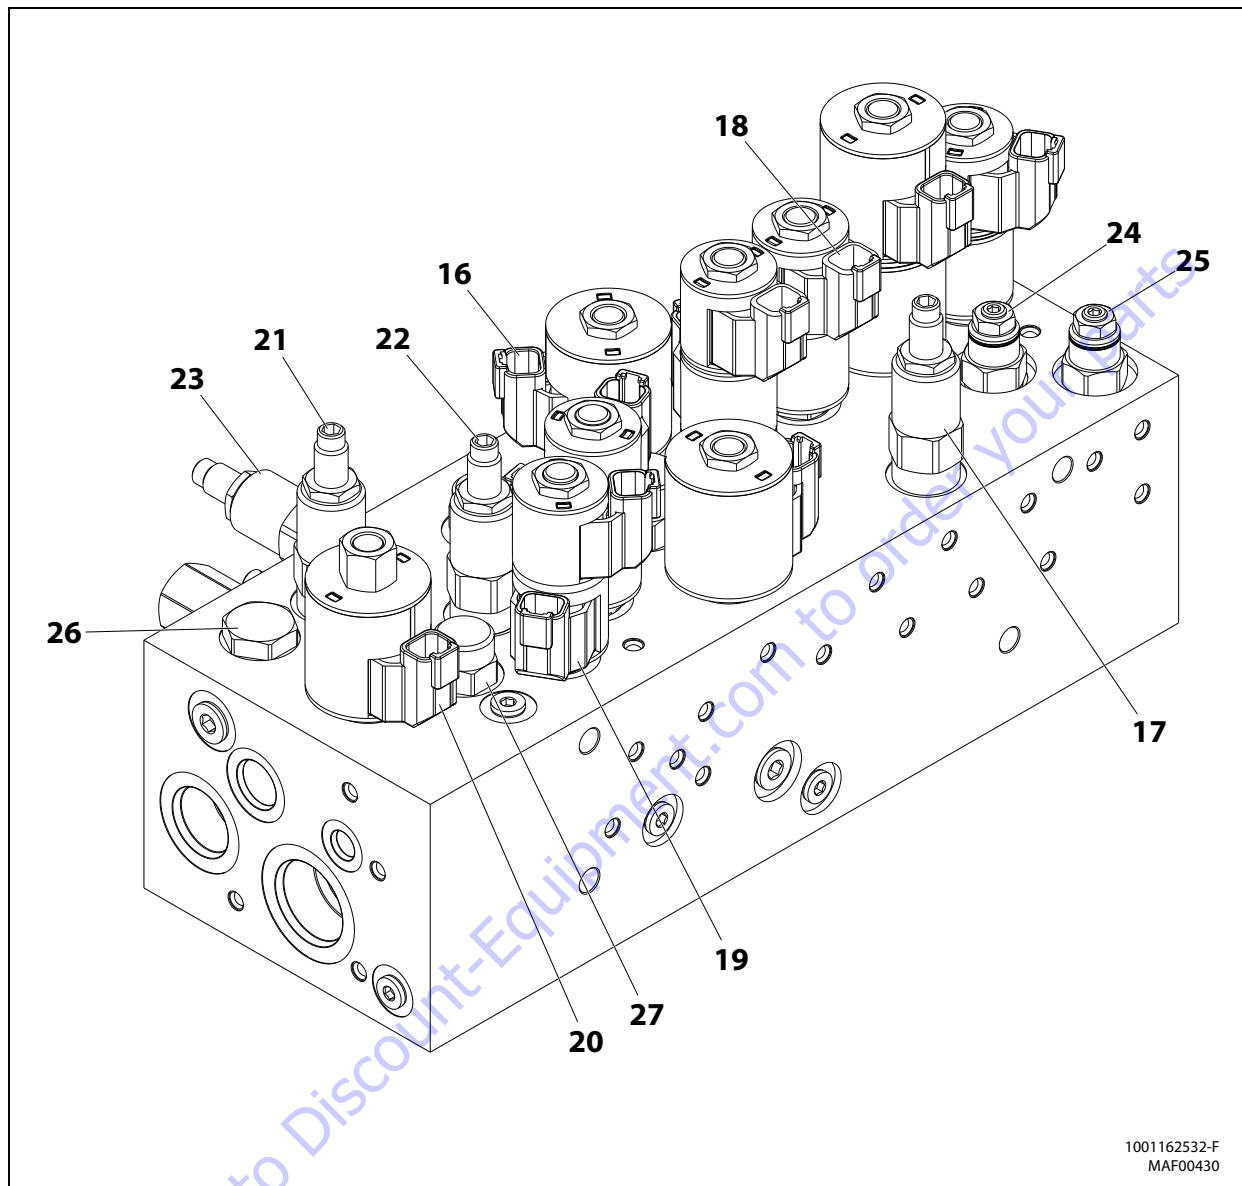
Main Control Valve Identification (400S) - Sheet 2 of 2
